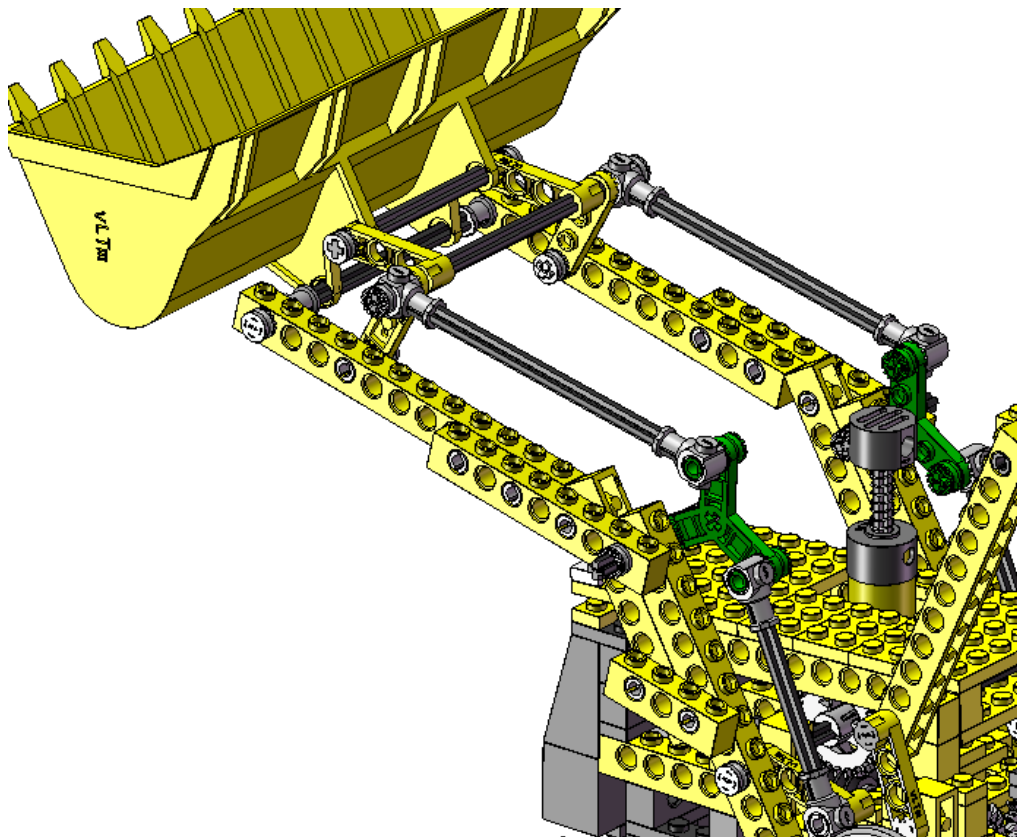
Both green pieces are redundant pieces. To get the LTM\_8862's mechanism "frontal shovel" self-aligned, a fixed joint between both might have to be defined. This way, it becomes as only one piece.
